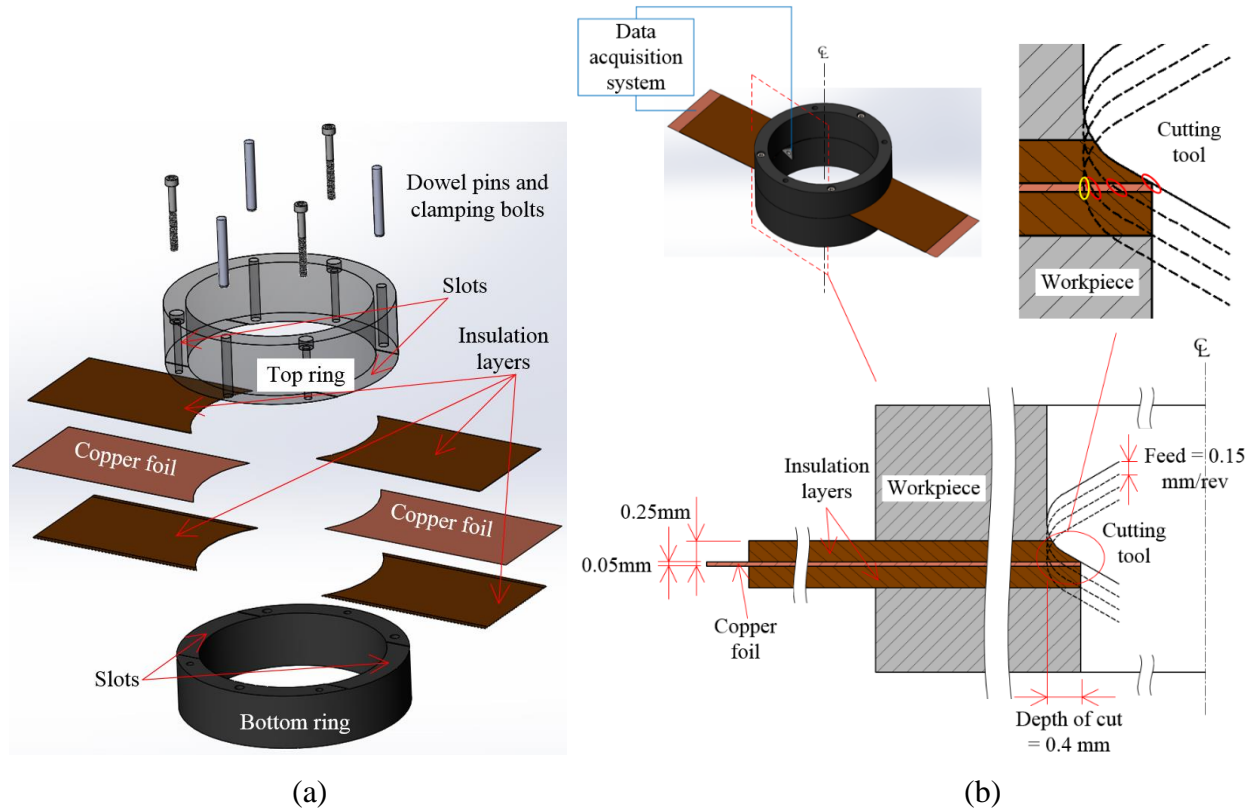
Tool-foil thermocouple method for finish boring: (a) exploded view of workpiece and (b) close-up cross sectional view of tool-foil contact during boring.
